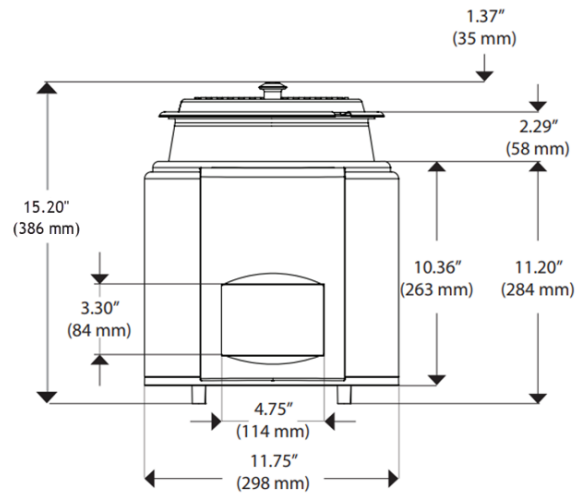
7 Qt Freestanding SinAqua Souper
